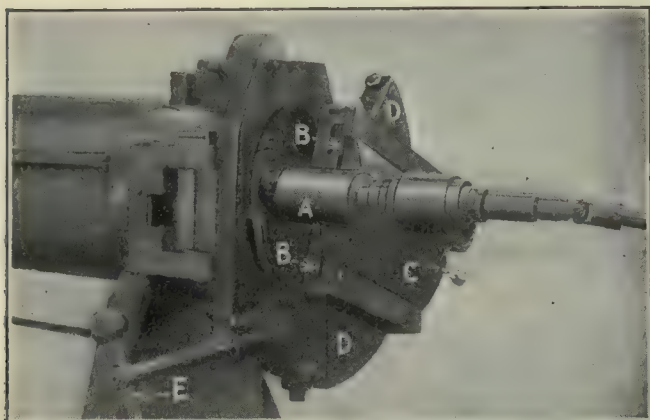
ATTACHMENT FOR MILLING RECESSES IN BREECH END
